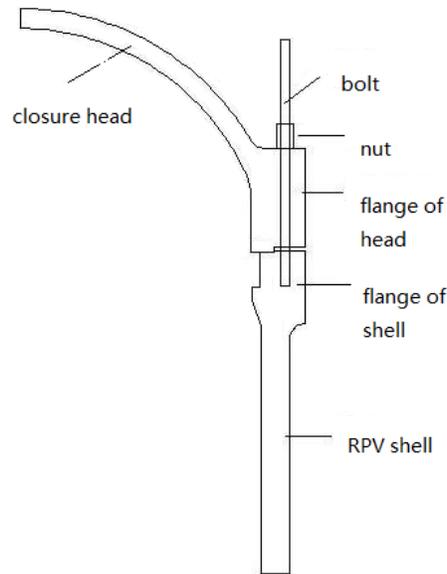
Overall geometry of RPV closure header, shell and bolt
